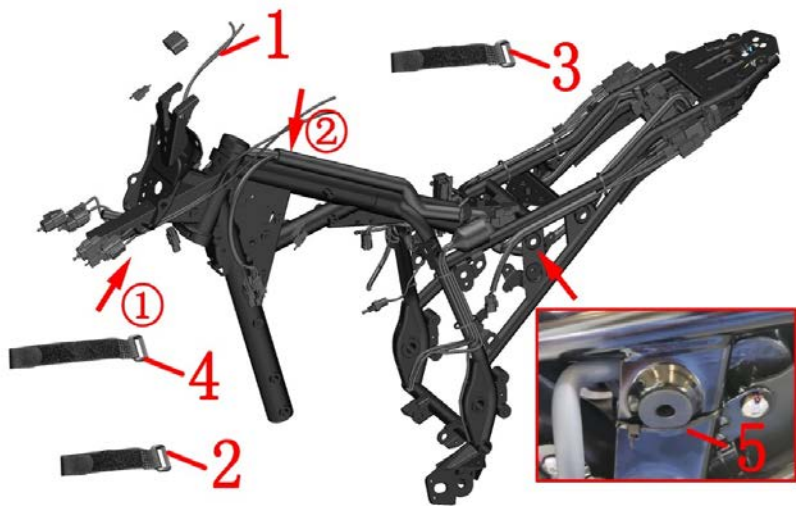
Frame Assembly		Electrical Components Assembly-1		CHK
